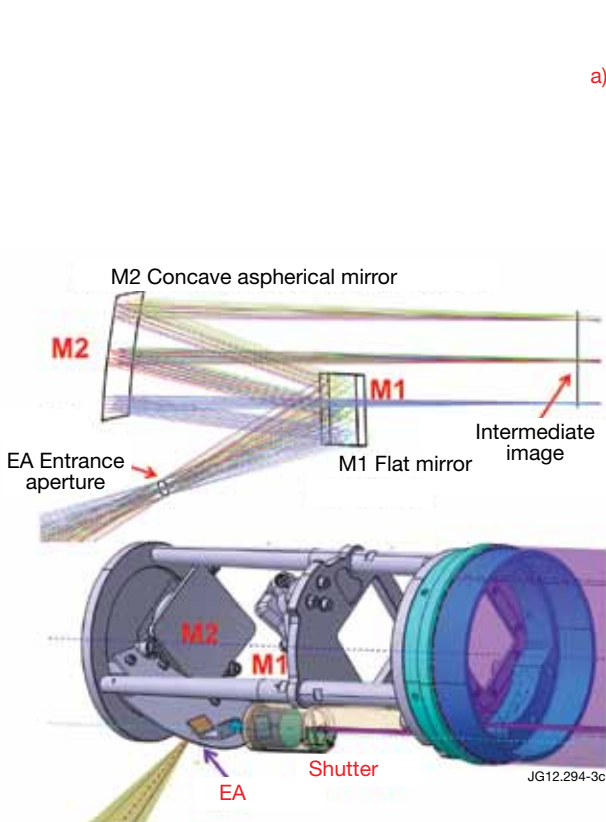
The endoscope optical head with in-vessel shutter actuator: a) optical design and b) the mechanical layout.
